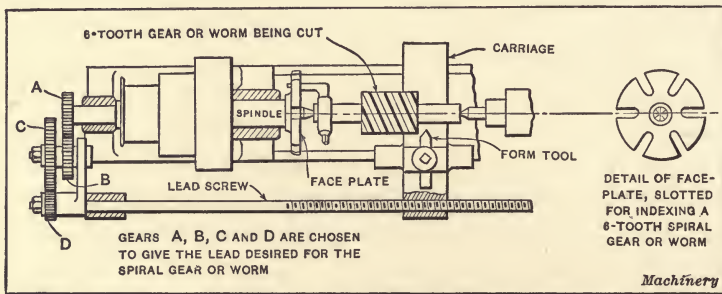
The Lathe Method of Planing Helical Teeth in Gears or Worms
